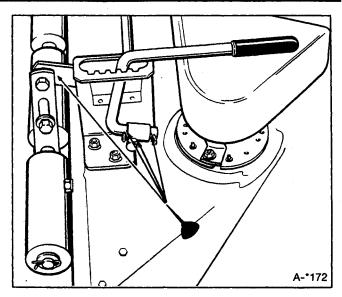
Lubricate Height Control Lever & Point Where Roller Bar Contacts Bracket
